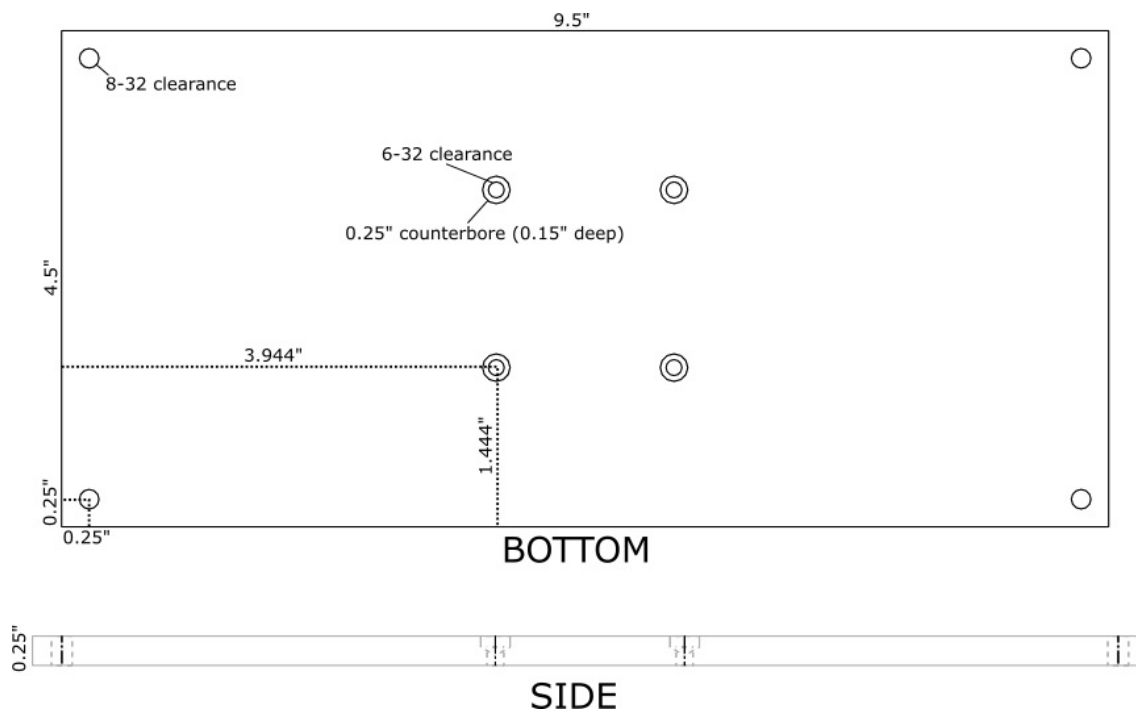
Custom “plate” machined part manufactured by eMachineShop. Counterbored holes at center allow mounting custom “holder” part at top, and 8-32 clearance holes on sides allow mounting plate over stir plate onto optical table using optical posts. Later modifications to this part include increasing counterbore depth to the 0.15” measurement shown in the figure, and additional features circled in Fig. 2.2, which include mounting holes for peristaltic pumps matching the pattern shown in Fig. A.4(c), and a 3/16” trench milled through to the center to enable fast measurement of stir plate rpm with a Hall probe. Two tapped 6-32 holes were additionally added at center 13/16” apart to allow mounting a white LED for photosynthetic organisms.
